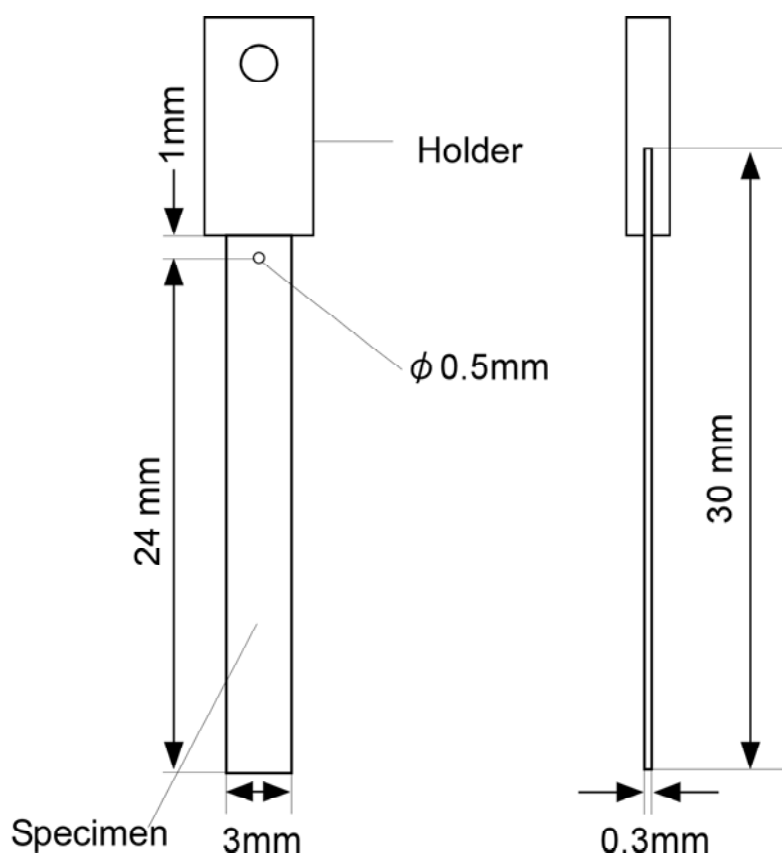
Shape and dimensions of fatigue test specimen.
